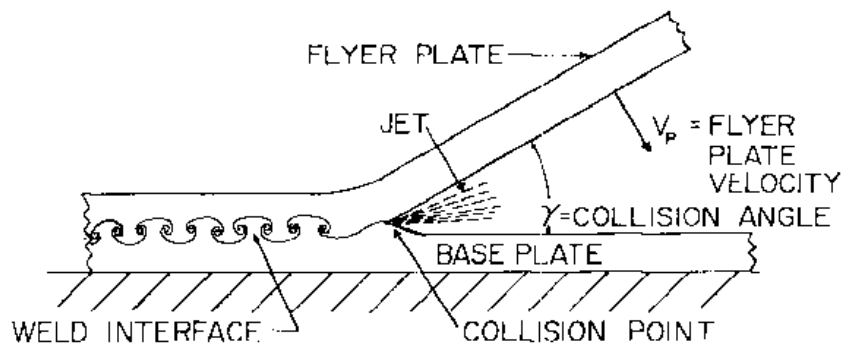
Schematic of an oblique collision achieved during explosive welding [191]
